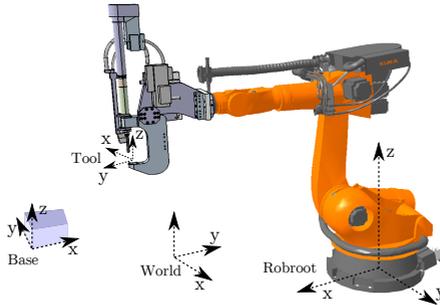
6DOF industrial robot manipulator with a welding tool, overview of coordinate systems.
